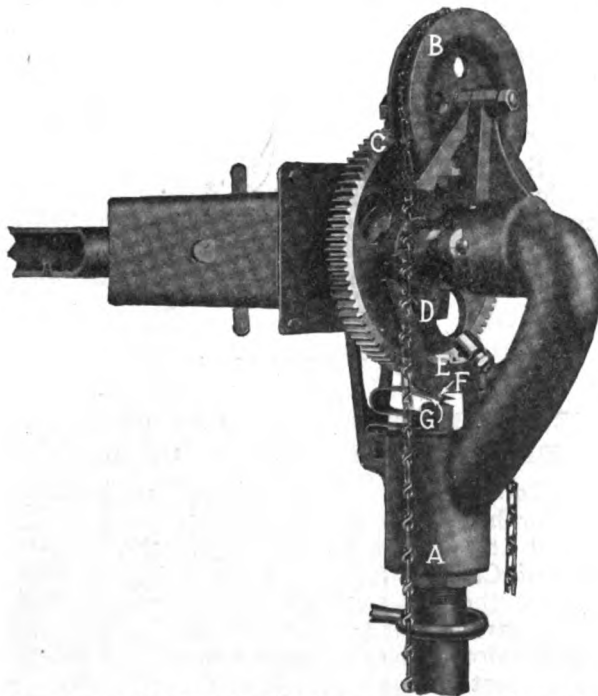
Assembled Valv-in-Head unit. A—Location of valve in gooseneck. B—Sheave wheel. C—Gear. D—Cam. E—Lever. F—Valve stem. G—Spring.
